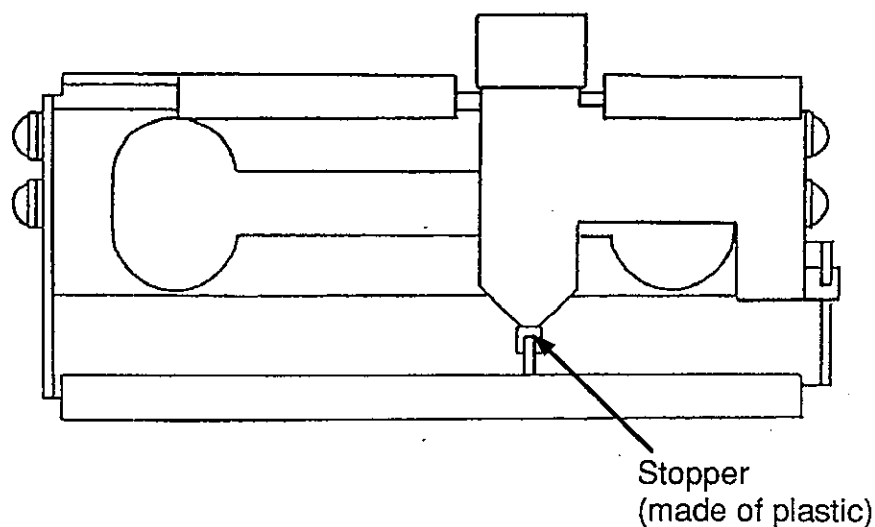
Pull out the stopper with cutting plier or a similar tool.
